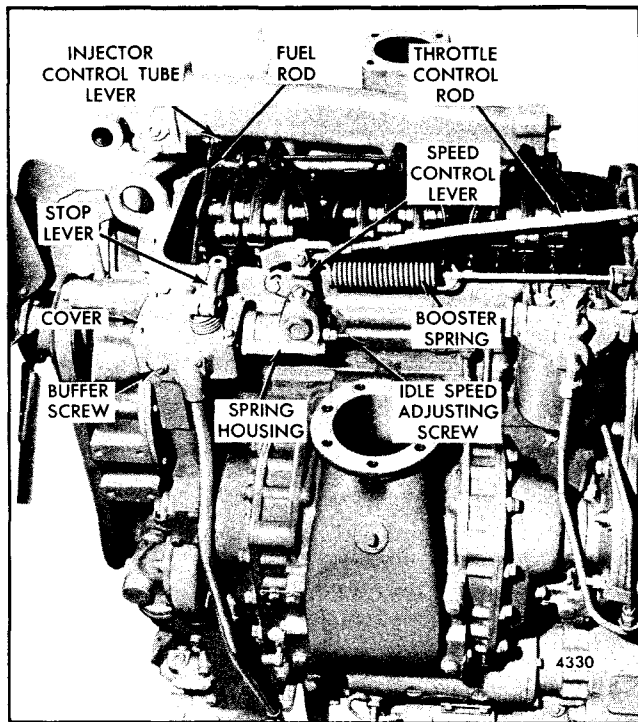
Buffer and Idle Speed Adjusting Screw
